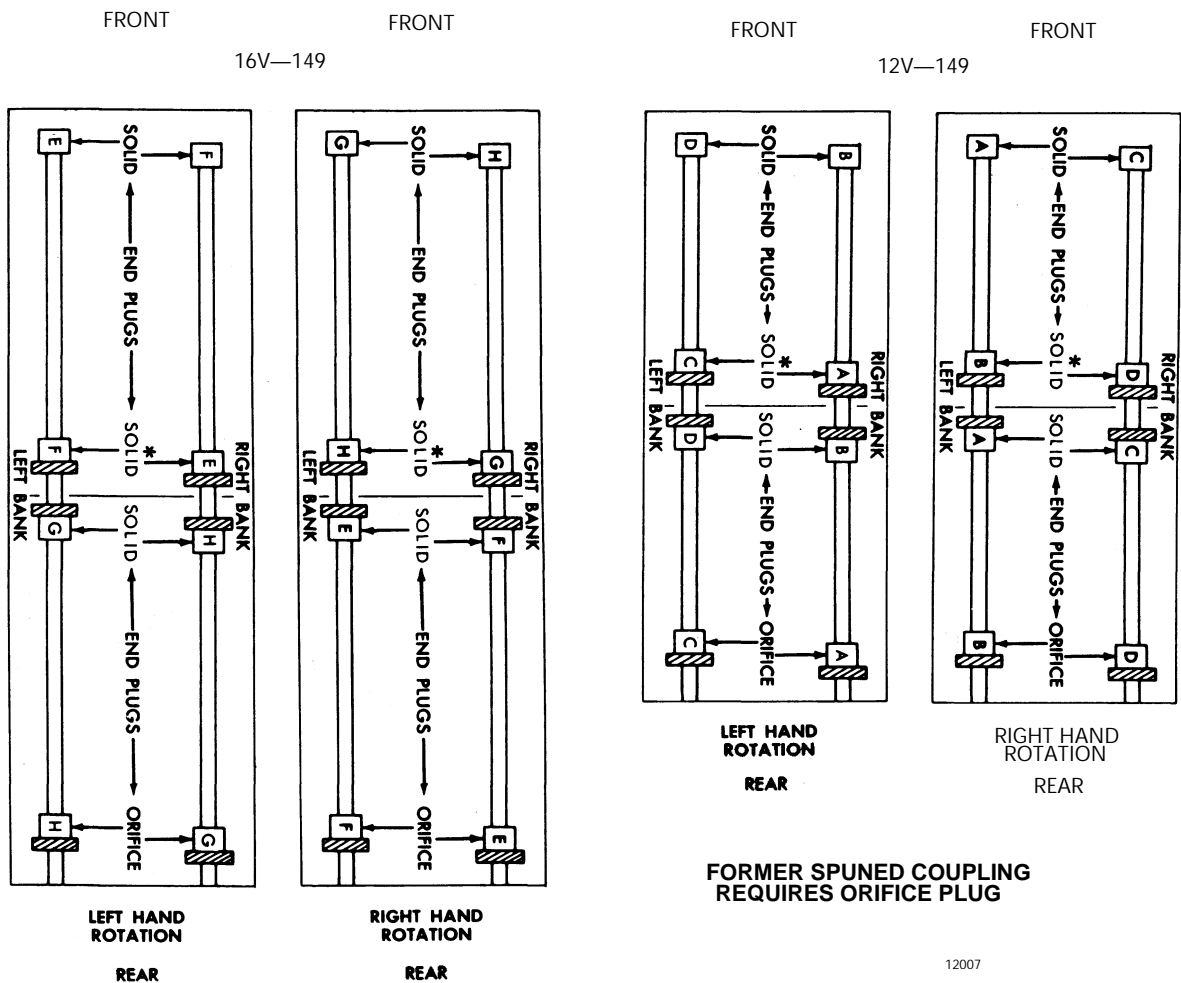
Location of Camshafts and Plugs - 12V, 16V-149
